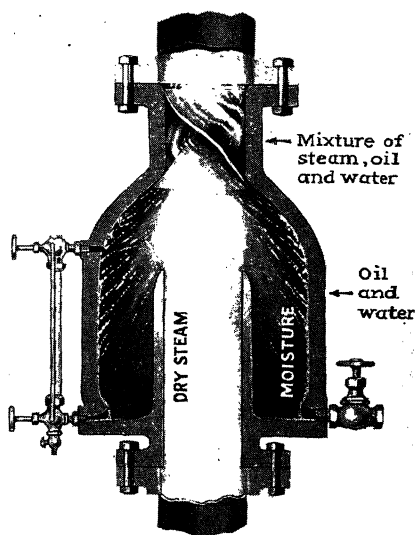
Sectional view of a centrifugal-type separator. (Courtesy The Swartwout Co.)
